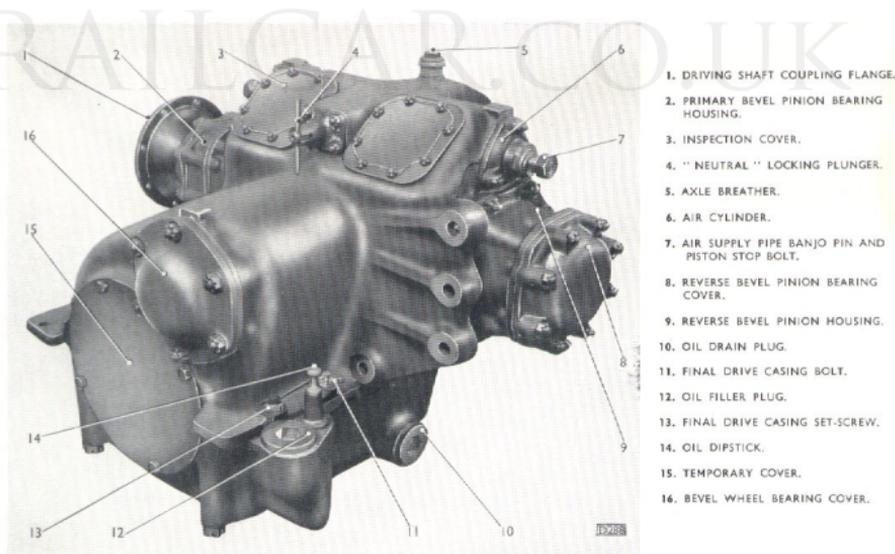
Final drive unit. (The indicator switch is not shown in this illustration).
